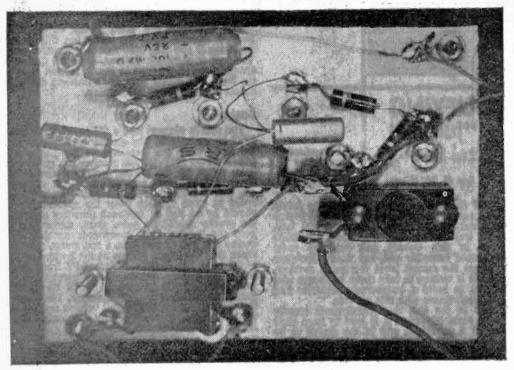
Details of the paxolin or Formica base, indicating positions of the solder tags.
